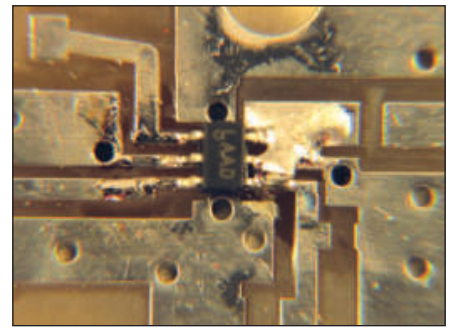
The left side of this 2 mm long component has been cleaned up with desoldering braid, while the right side still has excess solder.
